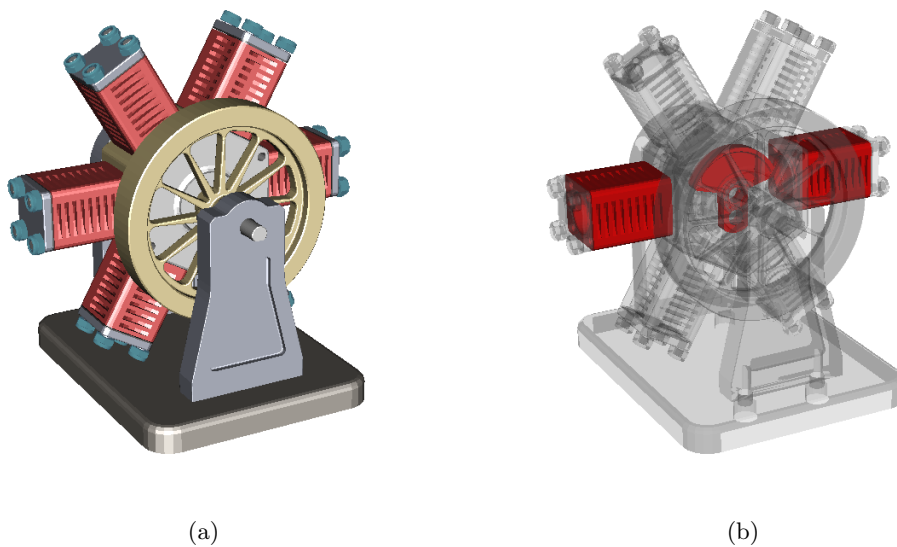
(a) The Pneumatic 6-Cylinder Engine assembly with six cylinder heads and simple internal mechanics. (b) The selected disassembly problem with three required partitions highlighted in red.
